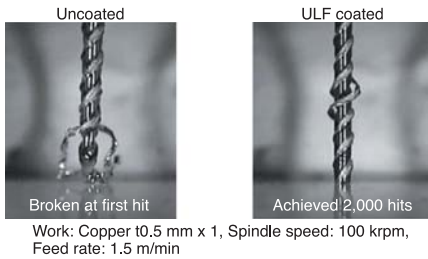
Breakage resistant effect of ULF coating on machining of copper panel ($\phi 0.25$ mm drill)
